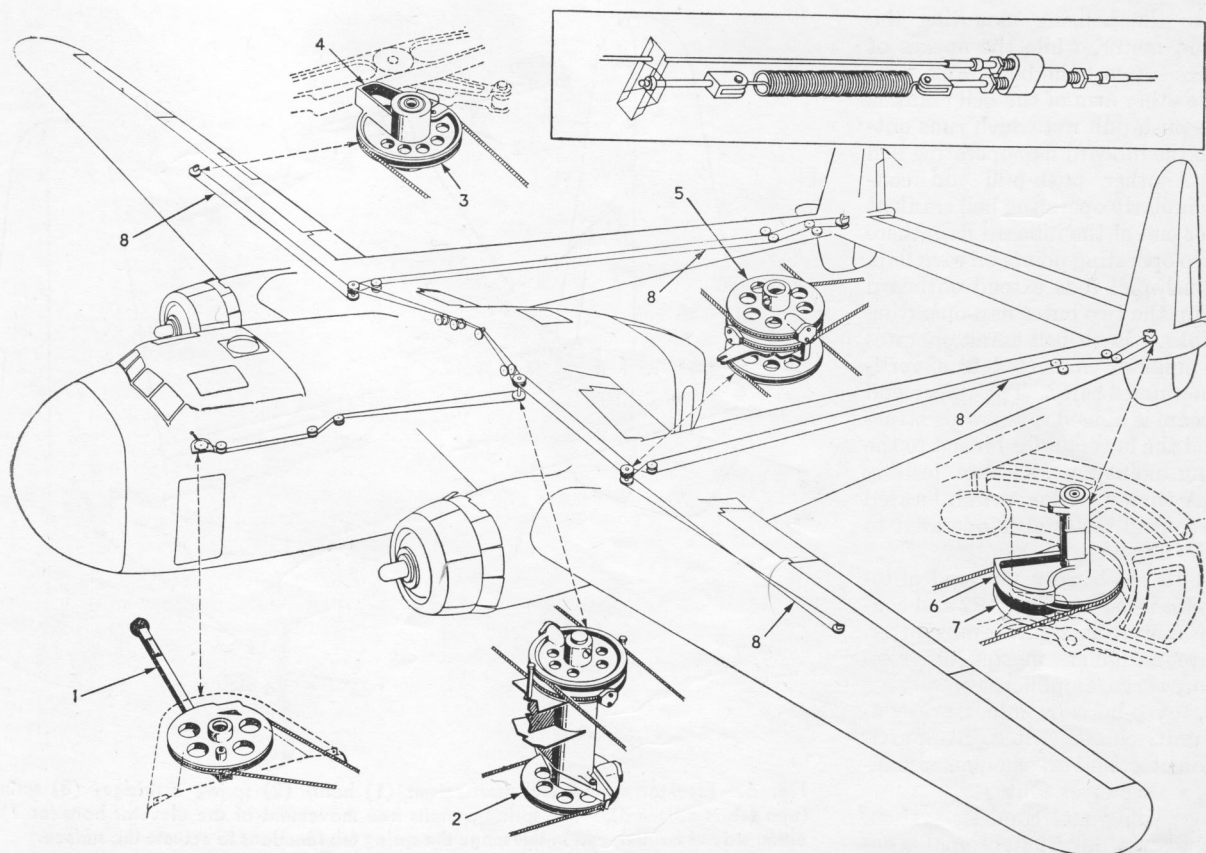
Surface control lock system: (1) locking arm extending across the pilot's seat (locked position); (2) tie-in sector to locking arm; (3) aileron cam lock; (4) cam edge; (5) intermediate sectors; (6) elevator cam edge; (7) rudder cam edge. The inset shows an emergency release for the cam to hold it in open position if the control cable is shot away or breaks in flight. Unit locations are seen at (8) in the main sketch.
